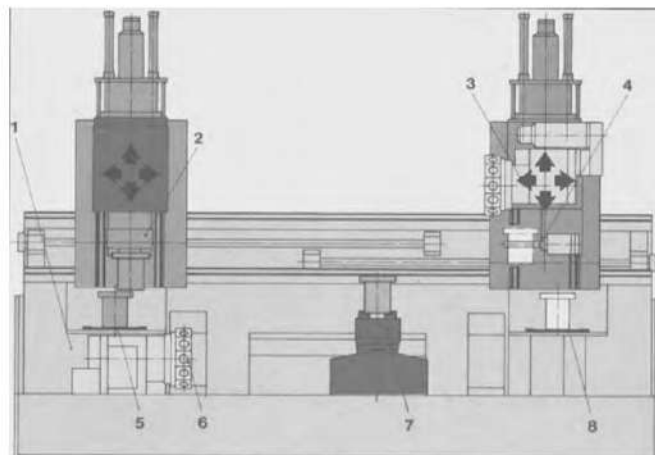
CNC vertical pick-up turning centre Hüller Hille DVTH300, 1-DV-Transfer, 2-movable spindle, 3-turret head on cross-slide, 4-unloading gripper on cross-slide, 5-workpiece supply, 6-stationary turret head, 7-stationary spindle, 8-workpiece removal (Courtesy, Hüller Hille, Germany)
